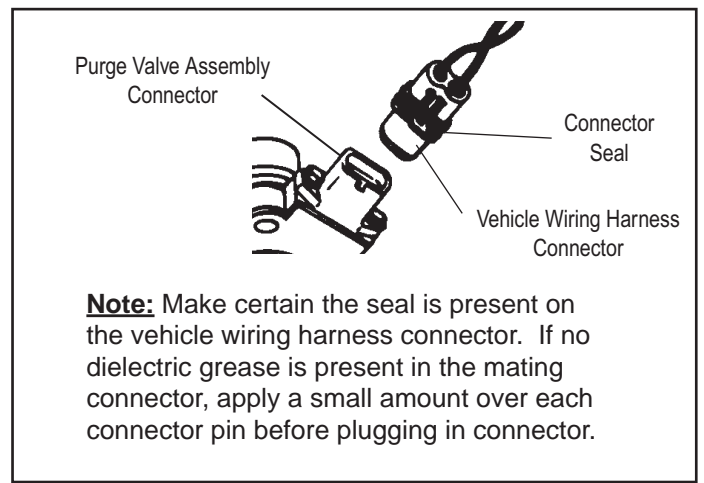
Purge Valve Assembly & Wiring Harness Connectors
